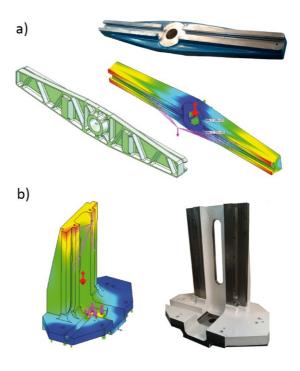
Example of cast-iron parts: a) Crosspiece; b) Column
